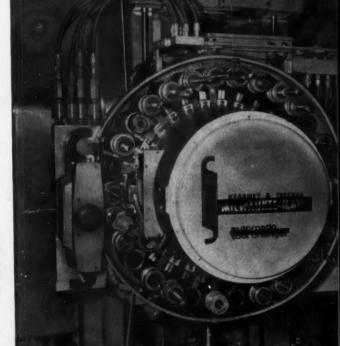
All cutters required for both the gimbal block and the spider are stored in this automatic tool changer on the milling machine. Thirty tools can be carried in the changer and one in the spindle, giving the machine a total of thirty-one tools from which to select during the reading of any one or two tapes.
